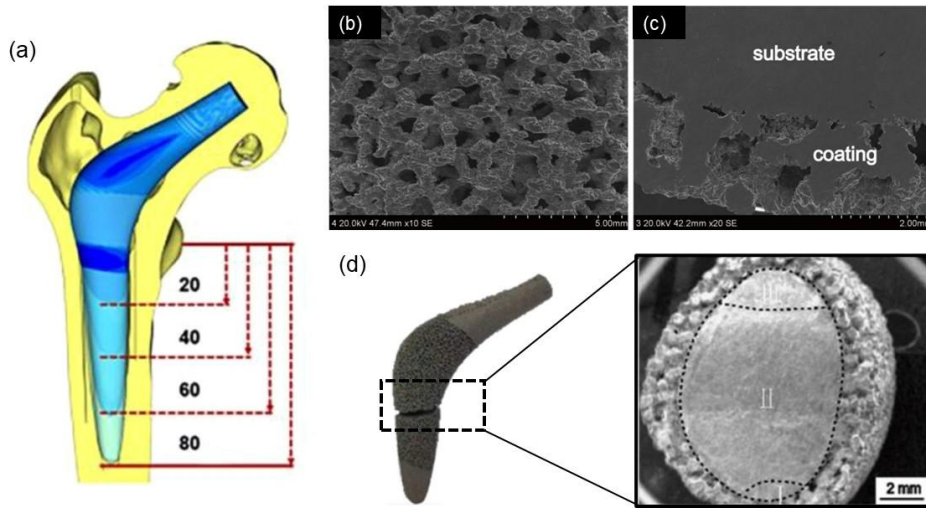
(a) illustration of the designed lengths, (b) porous coating with trabecular structures (c) the cross-section of the porous coating on the stem and (d) fracture surface of the tested stem with a length of 60 mm<sup>[240]</sup>
